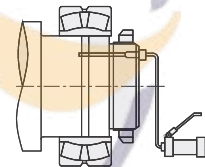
Removal Using Oil Injection Hydraulic Pump
